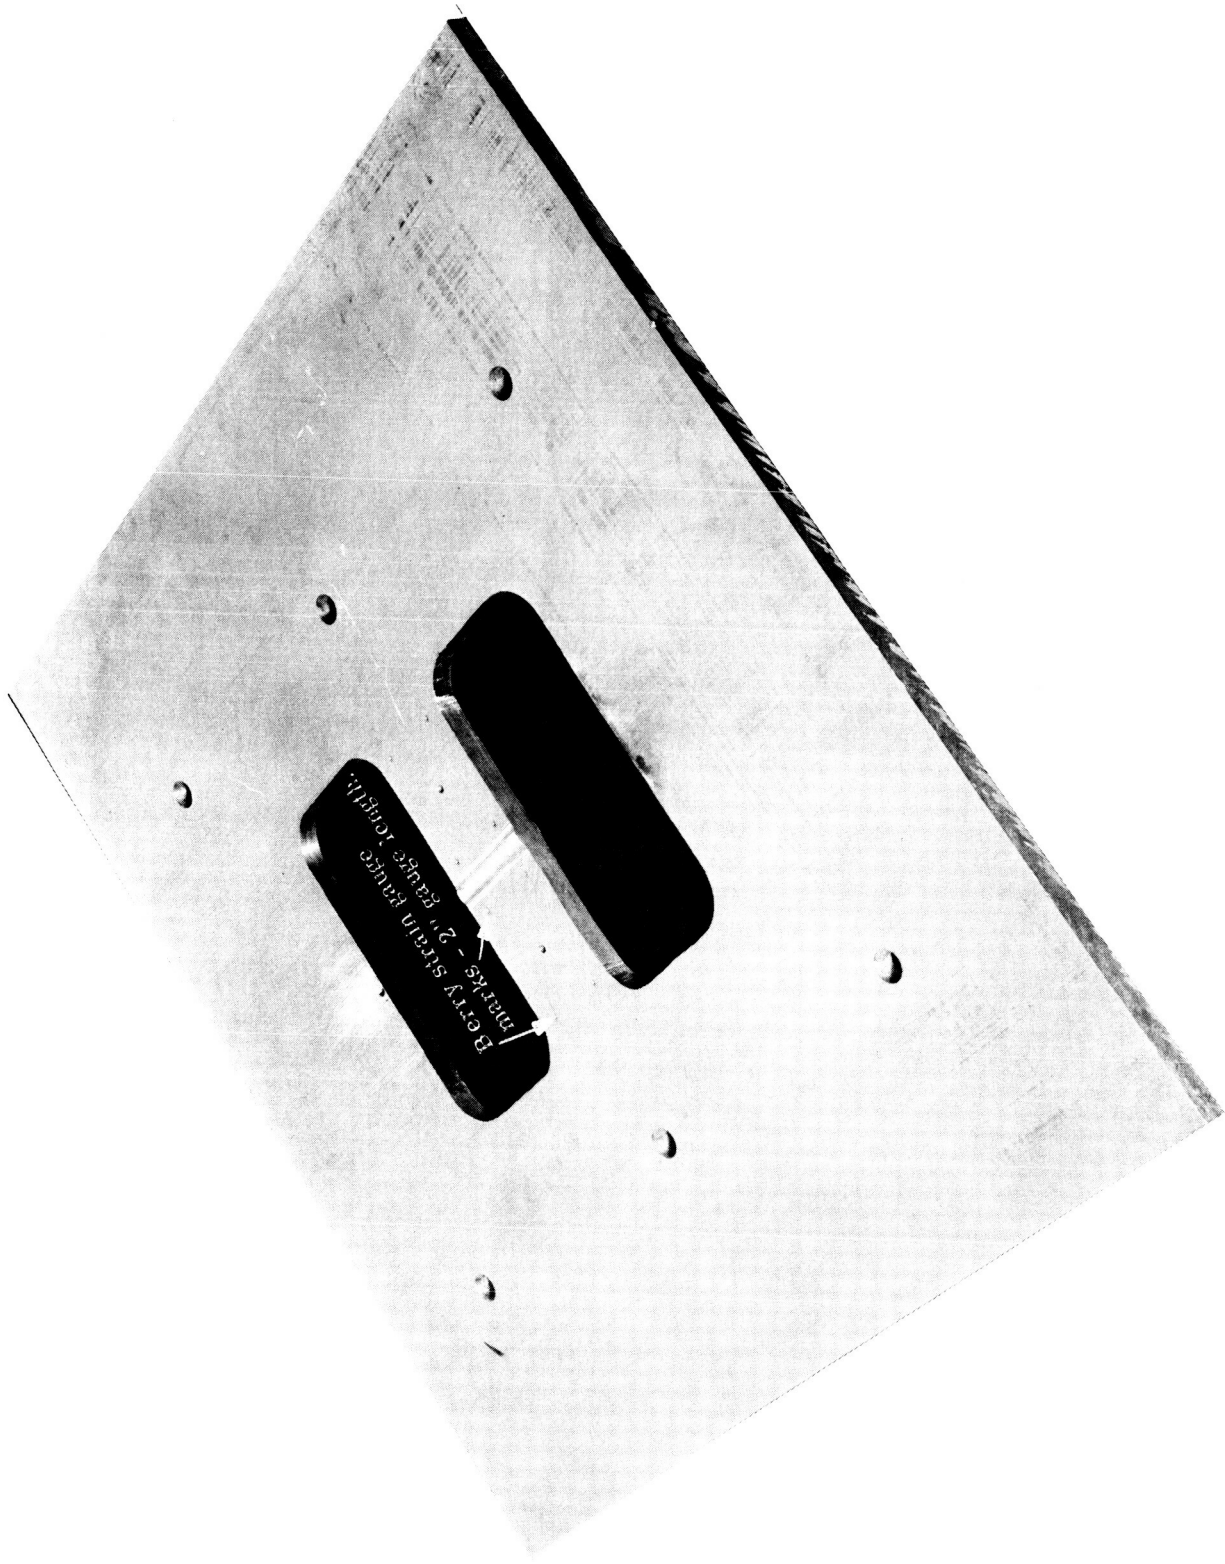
Typical H-Plate specimen for stress corrosion tests of weldments
